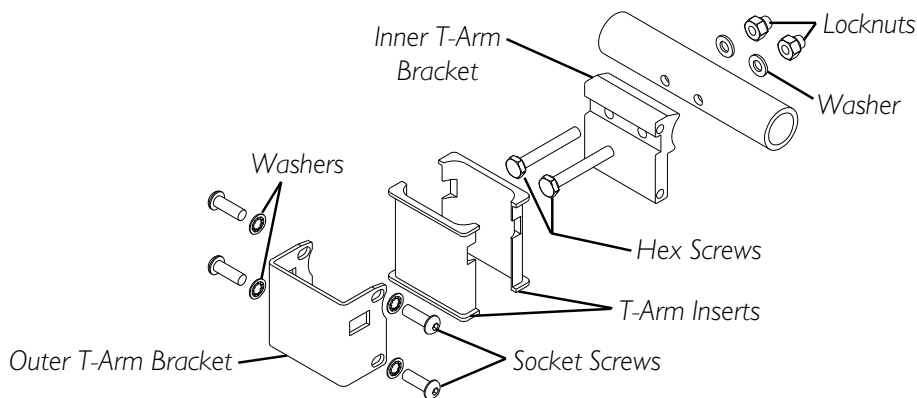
INSTALLING THE T-ARM SOCKETS
